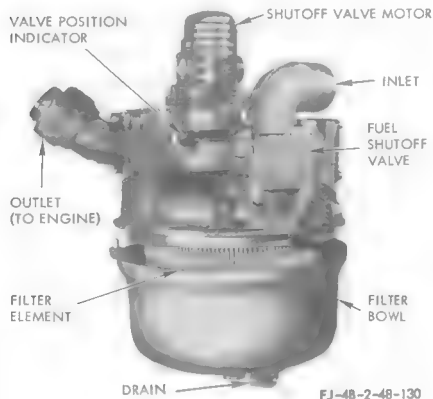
Fuel System Filter and Shutoff Valve
